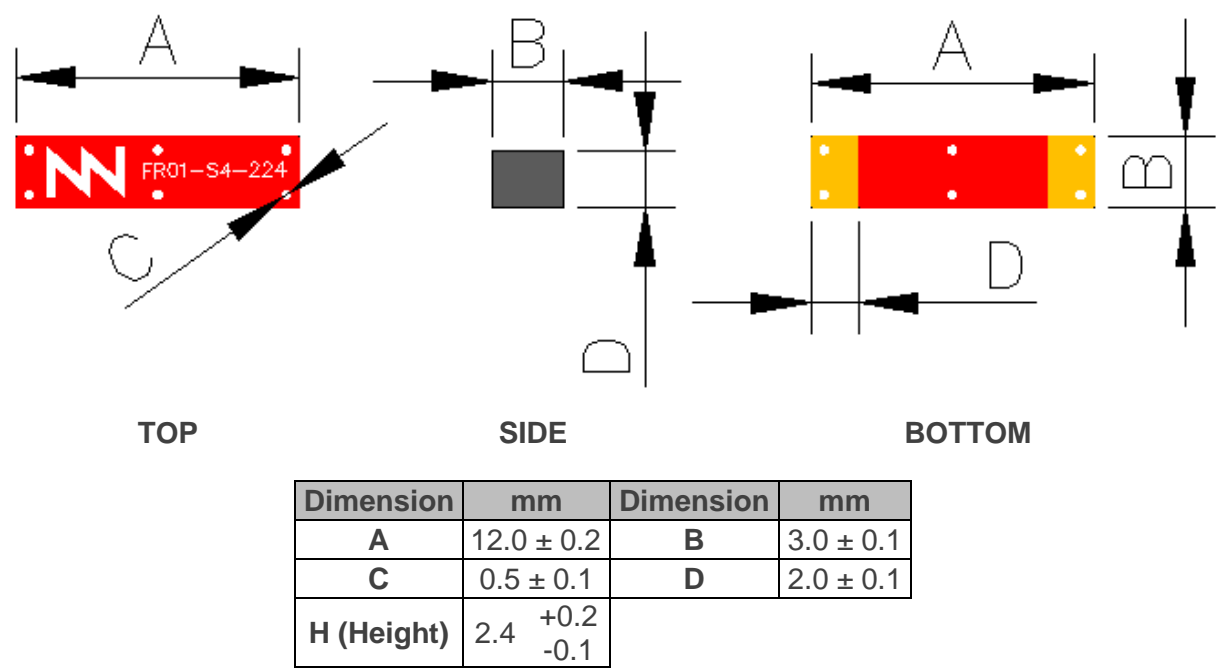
RUN mXTEND™ antenna booster dimensions and tolerances.
